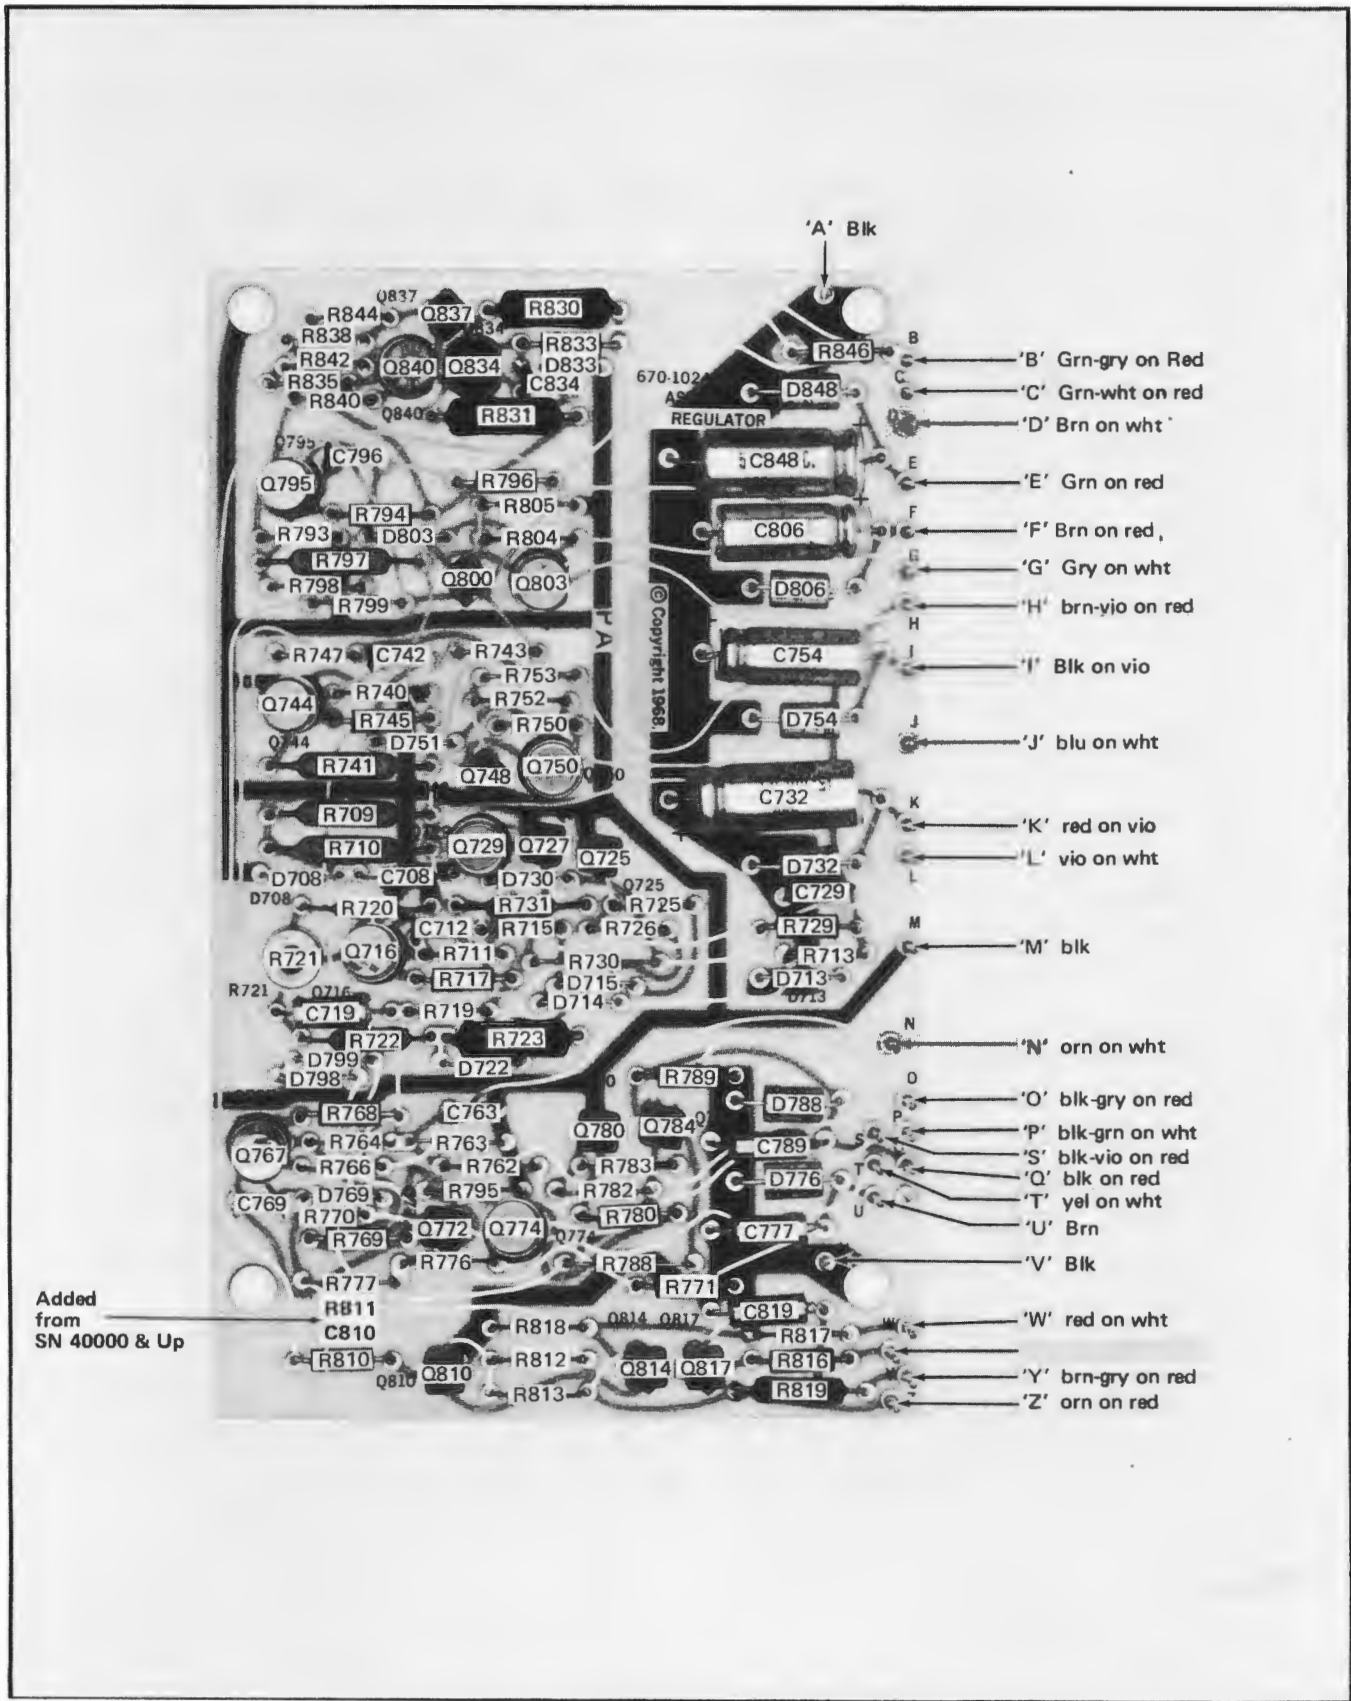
Component locations and wiring color codes on L.V. Regulator circuit board.
